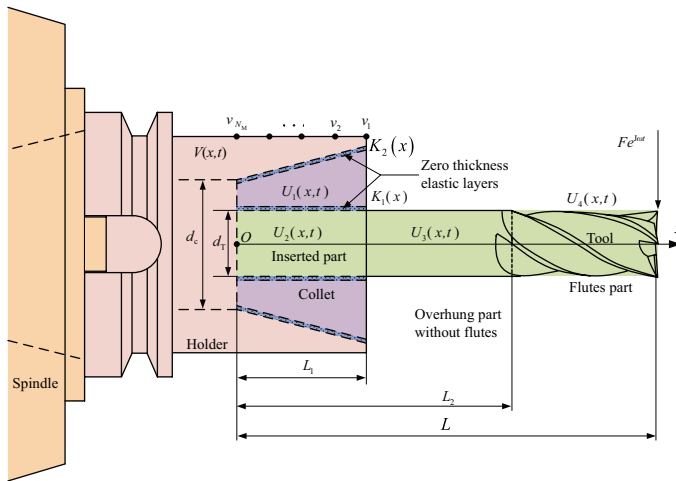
The tool-spindle-holder assembly. For a color version of this figure, see www.iste.co.uk/zhang/milling.zip
